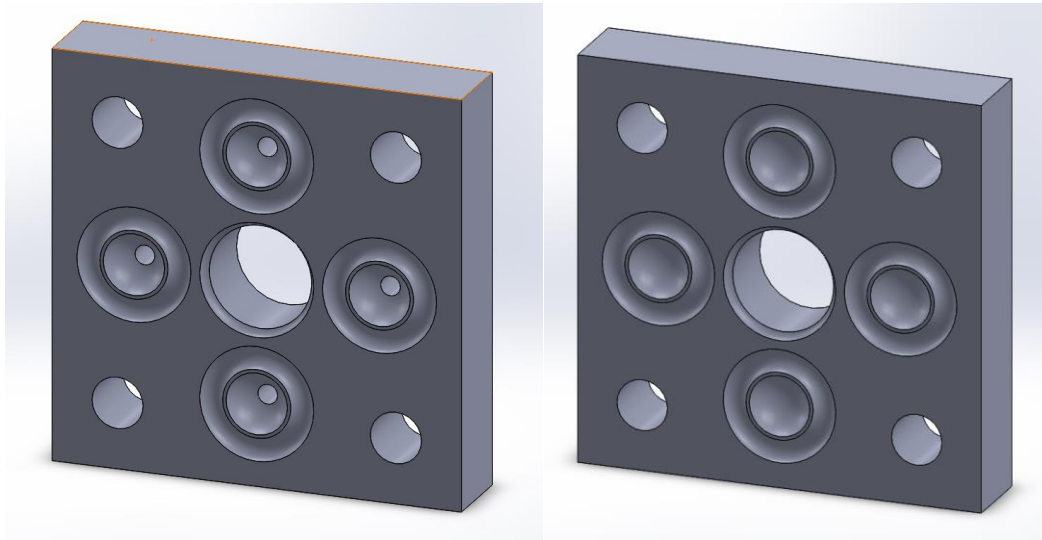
3D printed resin molds for forming 3.2 mm blood clots. The top mold with port for blood injection (left) and bottom mold (right) are printed separately.
